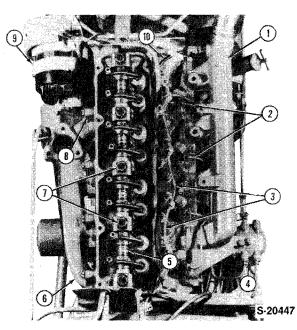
4-Cylinder Engine with Rocker Arm Cover Removed
